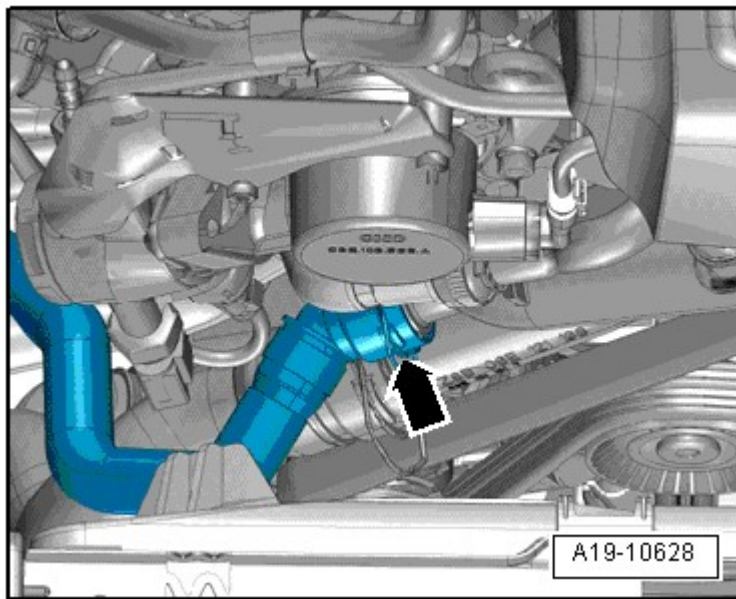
Identifying Clamp And Right Front Coolant Hose -Arrow- To Front Coolant Pipe
